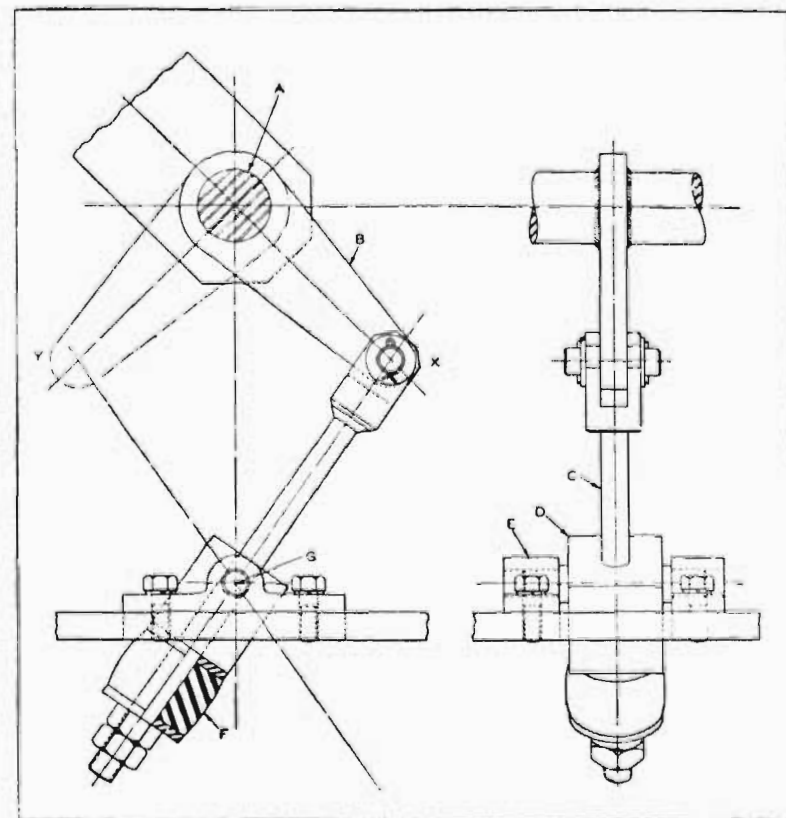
Mechanism for Stopping Rotation of Shaft *A* in Two Extreme Angular Positions.
